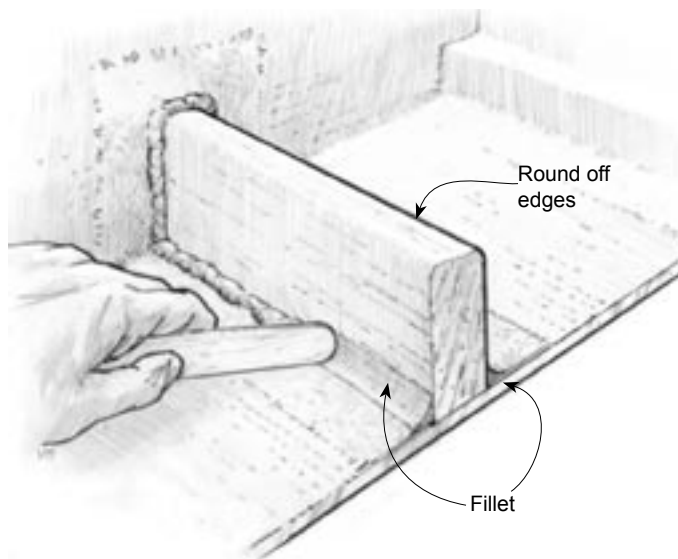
Epoxy mixture should squeeze out of the joint. Shape the squeezed out epoxy into a fillet
